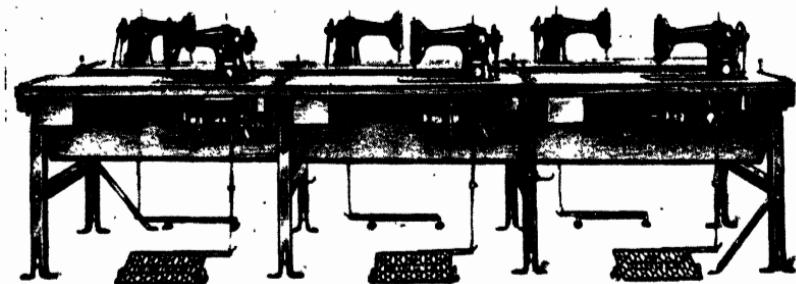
Sewing machines driven by individual motors. (*Courtesy of the Singer Sewing Machine Company.*)
